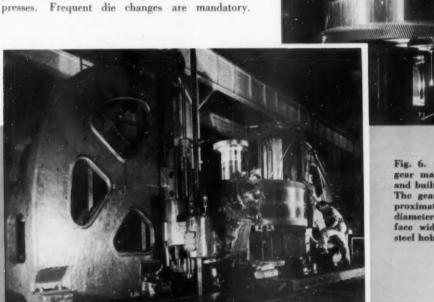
Eighteen-foot gear machine designed and built by Falk Corp. The gear shown is approximately 10 feet in diameter with a 36-inch face width. High-speed steel hobs are used.
